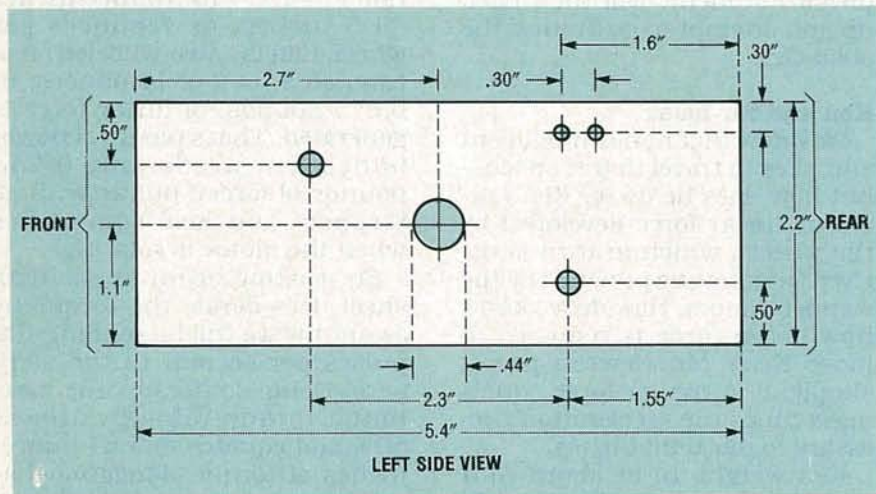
LEFT SIDE VIEW. The right side is a mirror image.
